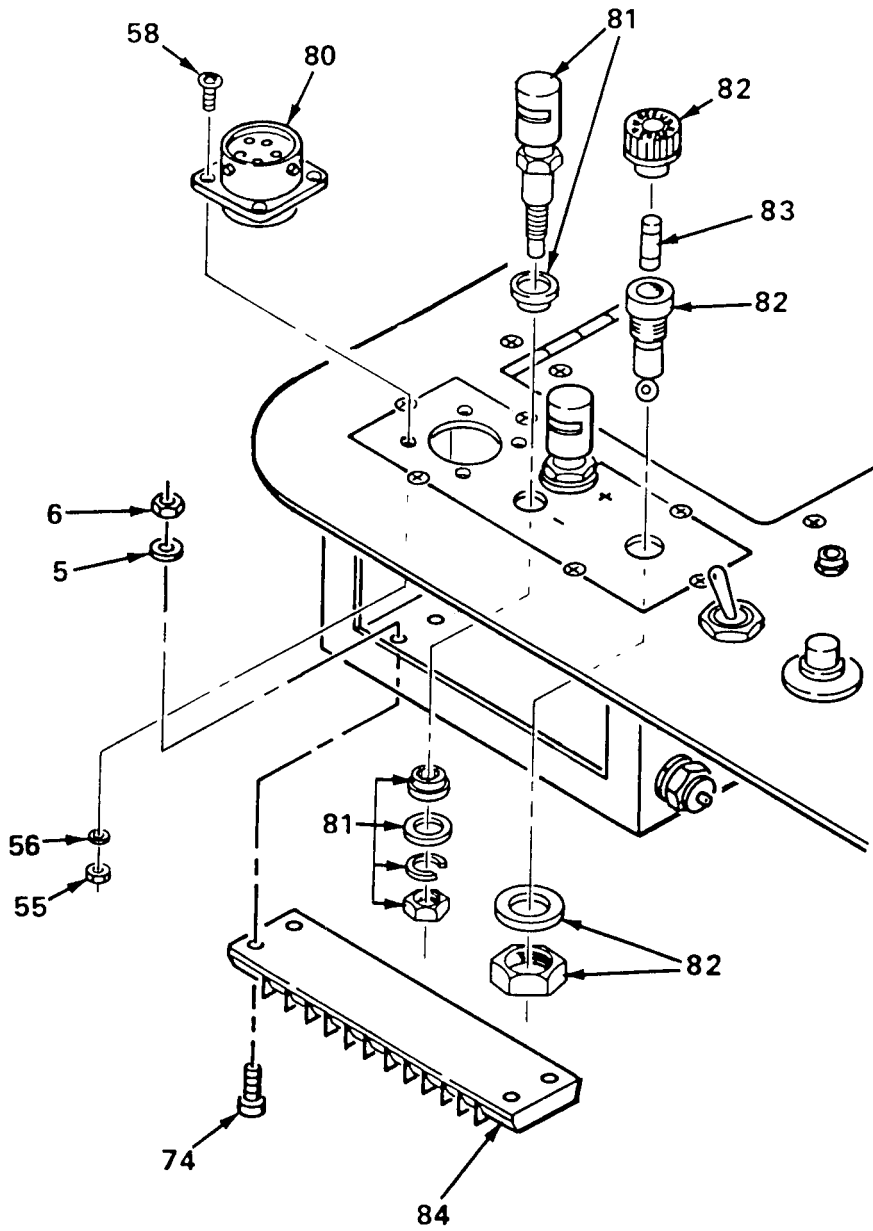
, Group 02. Test Set Panel Assembly (Sheet 6 of 7)
